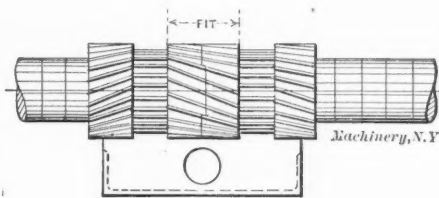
Milling the Bottom Surface of the Slide and forming the Grooves.
